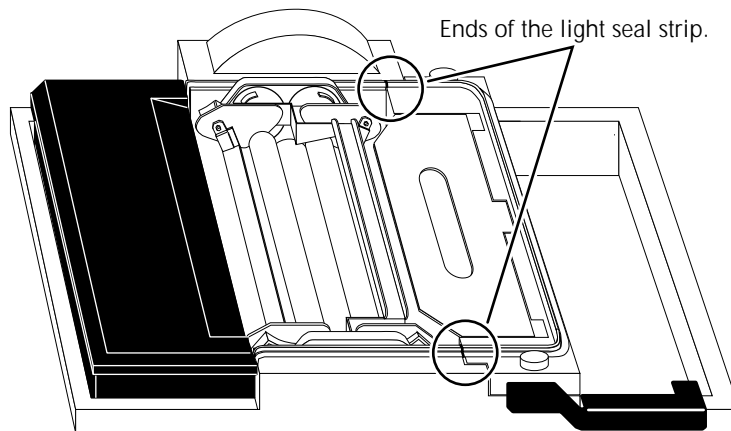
Attach the manual cut lever to the left end of the cutter shaft. Rubber strips on the edge of the media transport area and the cutter cover make a tight seal with the light shield. When you replace the cutter cover, make sure that the ends of these rubber strips are not caught under the cutter cover.
